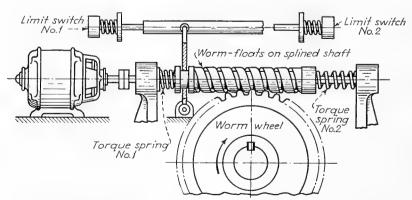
Combination mechanical and electrical torque or load limiting device for control of motor-operated valves, chucks, and clamps. When load becomes sufficiently high to stall wormwheel, the worm sliding on a splined shaft moves axially, similarly to a screw threading through a nut. This movement compresses a calibrated torque spring and opens a limit switch, thereby shutting off the motor.
